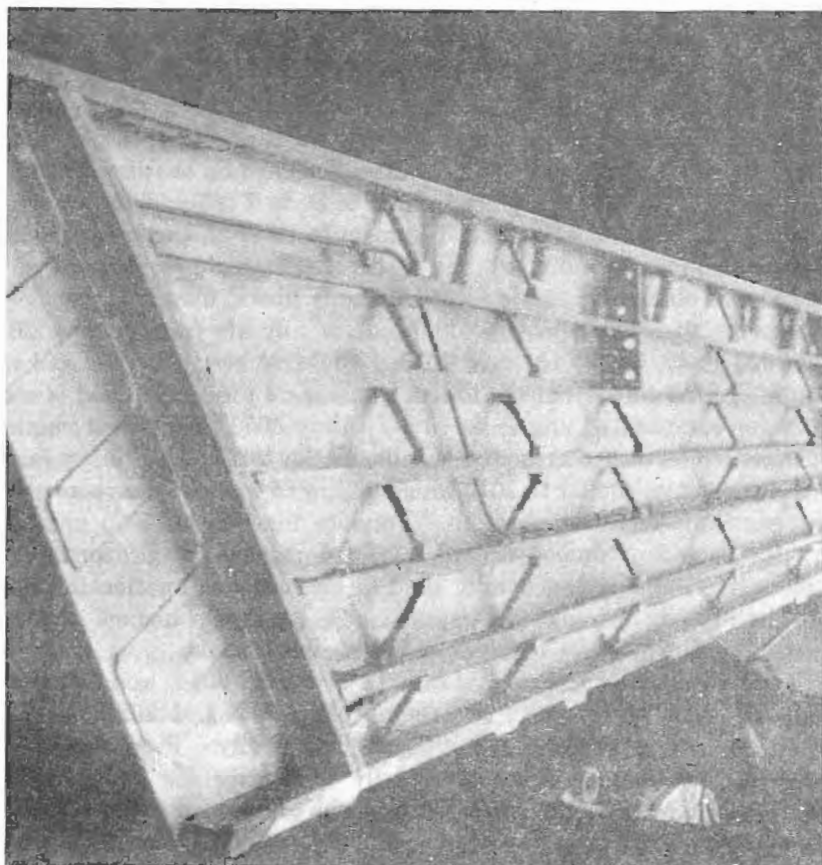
Modern Wing Construction—7075-T6 Machined Plate
